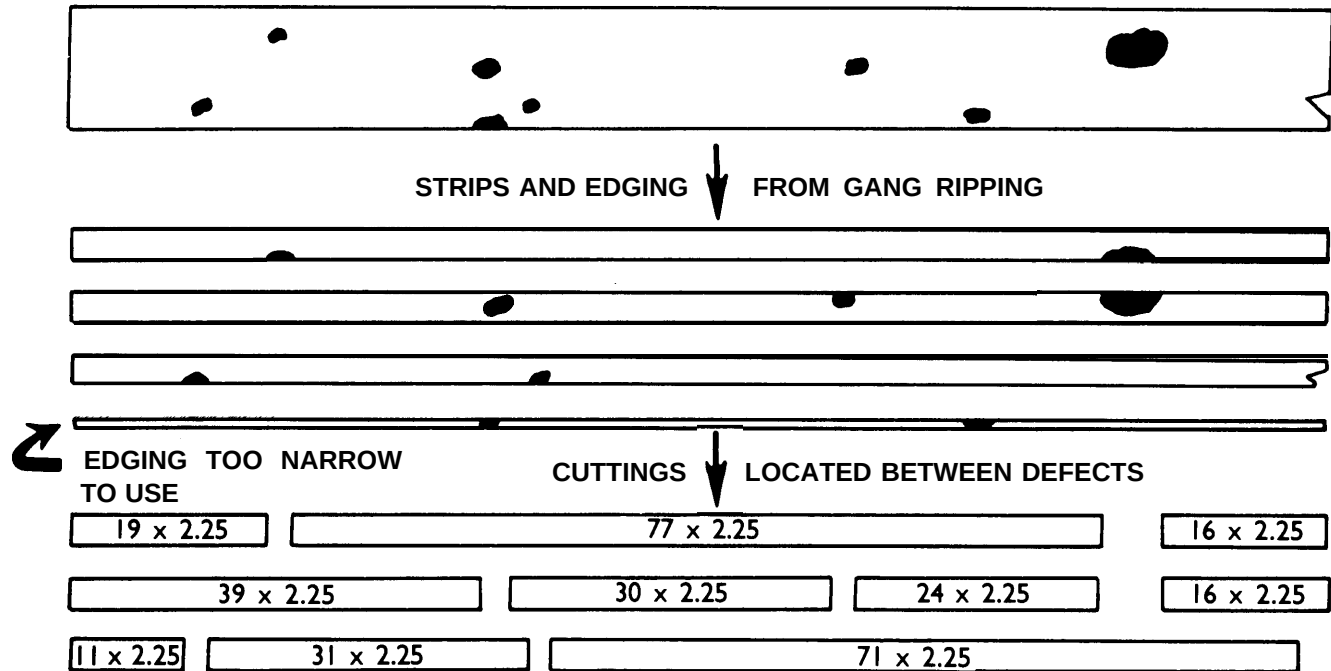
Gang ripping an 8.5-inch by 10-foot 2C board to 2.25-inch wide strips and removing objectionable defects to produce
